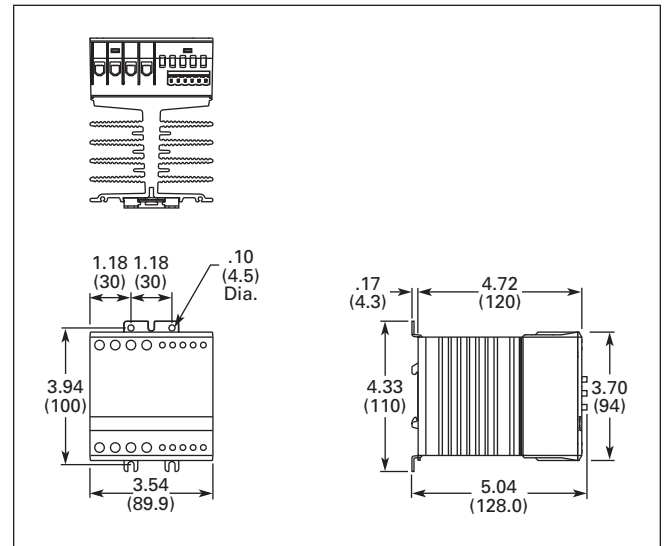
90 mm Frame — Approximate Dimensions in Inches (mm)
